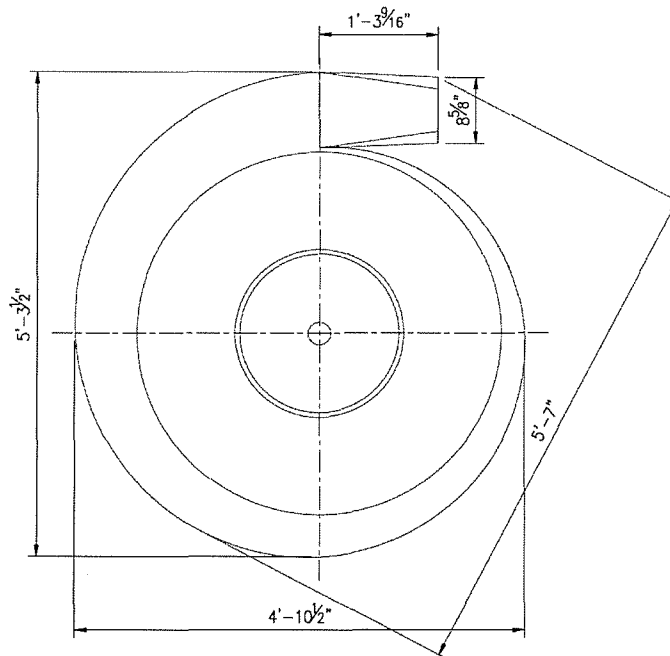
Compressor volute sketch prepared for design of mock volute.
